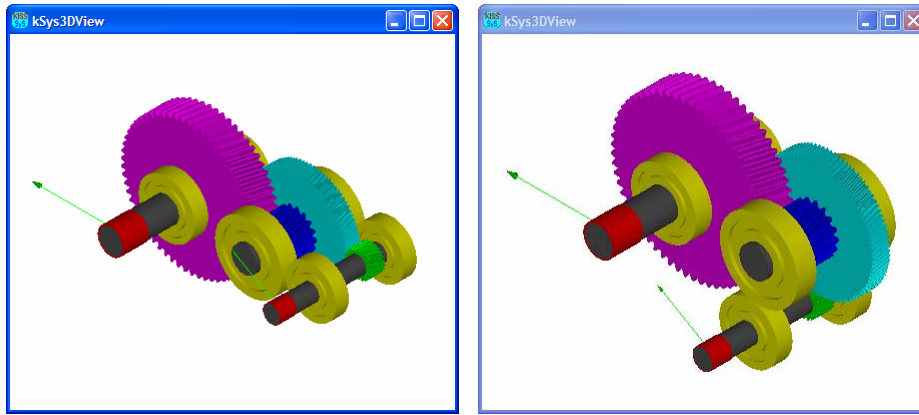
Left: Gearbox with horizontal arrangement, Right: with angles between axis.
